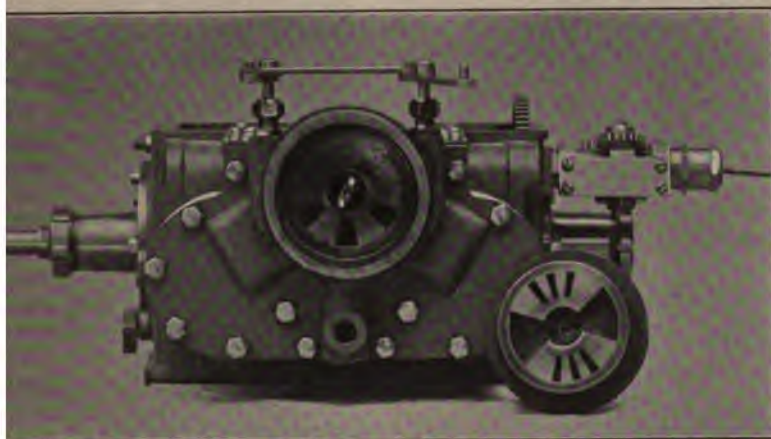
TOP VIEW OF ENGINE SHOWING VALVE.
